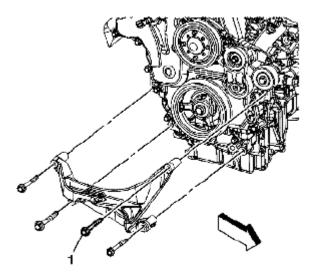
Identifying Upper Engine Mount Bracket Nuts And Lower Bracket Bolts
